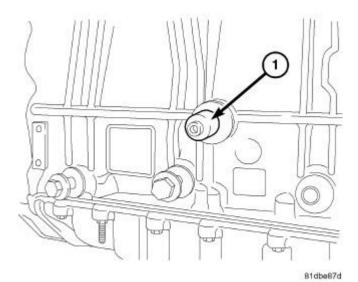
CRANKSHAFT LOCKING TOOL Courtesy of CHRYSLER LLC
